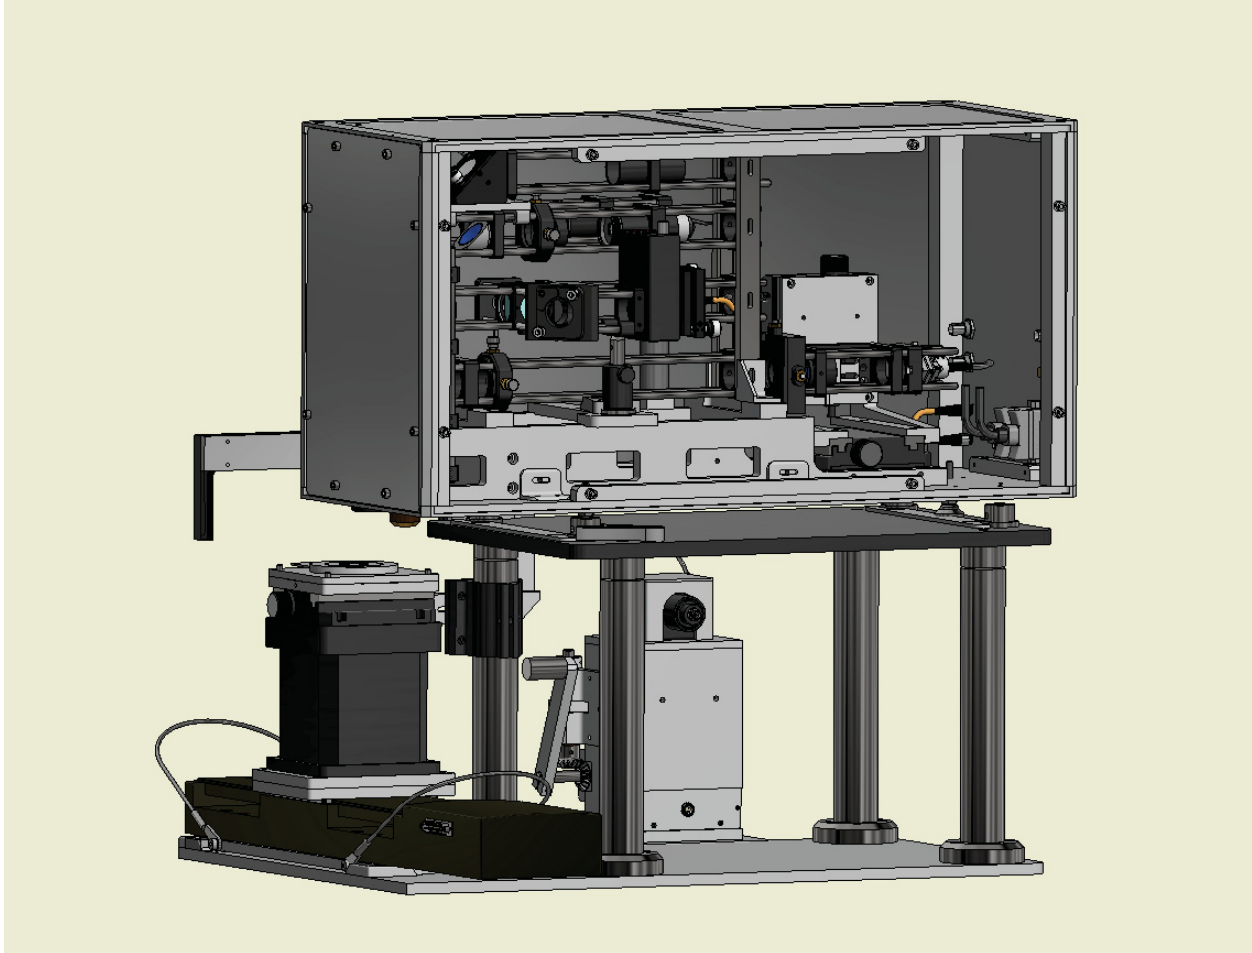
TCM head assembly showing internal components, sample stages and the thickness monitor.
